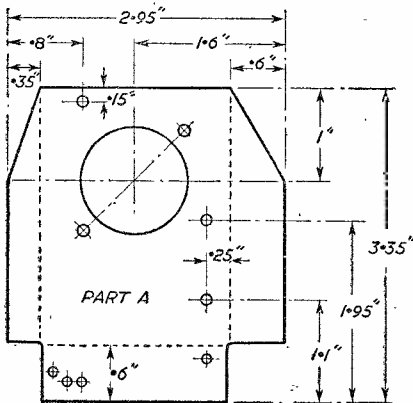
Cutting and drilling details of the chassis. See also Fig. 7.
